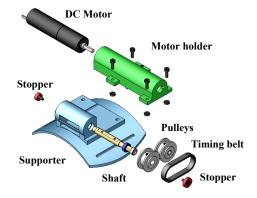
3D exploded view of the driving unit of FlexTorque.
